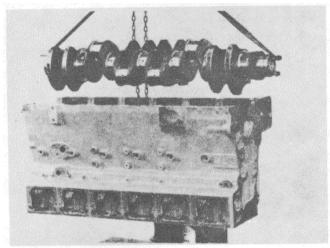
B-58. Lift the Crankshaft from the Cylinder Block
